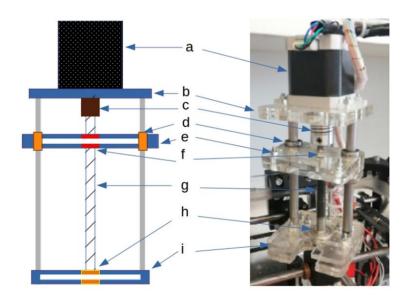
The extruder developed: a) motor (Nema 17 motor, 1.8° , 47.1 N / cm); b) engine support; c) homokinetic joint; d) linear bearings (LM8LUUM); e) mobile cart with fixation of the syringe stem; f) traction nut; g) endless screw (d = 8 mm); h) bearing (608ZZ); I) base and fixation of the syringe handle.
